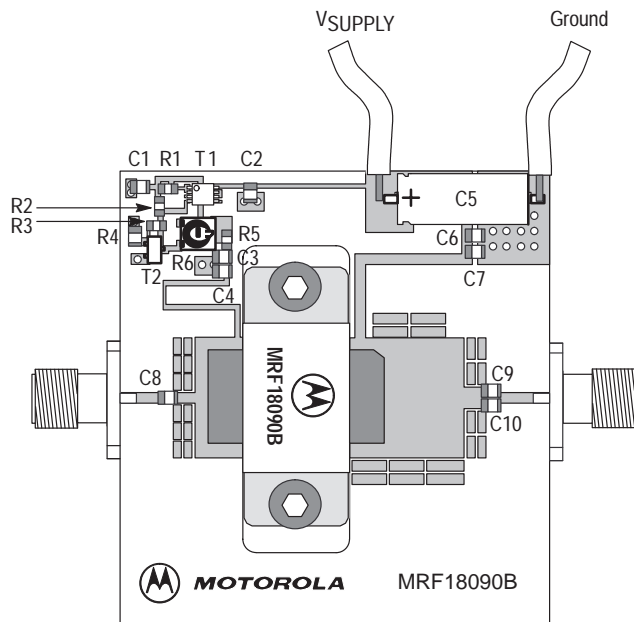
1.93 – 1.99 GHz Demo Board Component Layout
